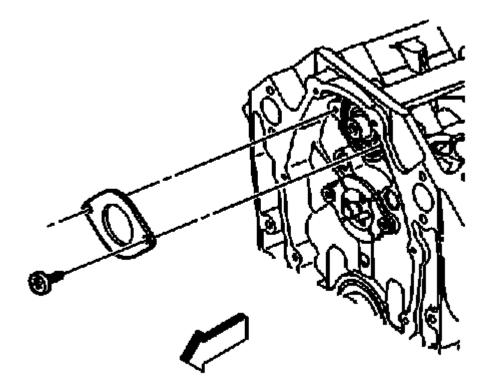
View of Balance Shaft Retainer & Bolts Courtesy of GENERAL MOTORS CORP.
